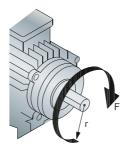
Torque on the motor shaft is the force (F) x radius (r)
